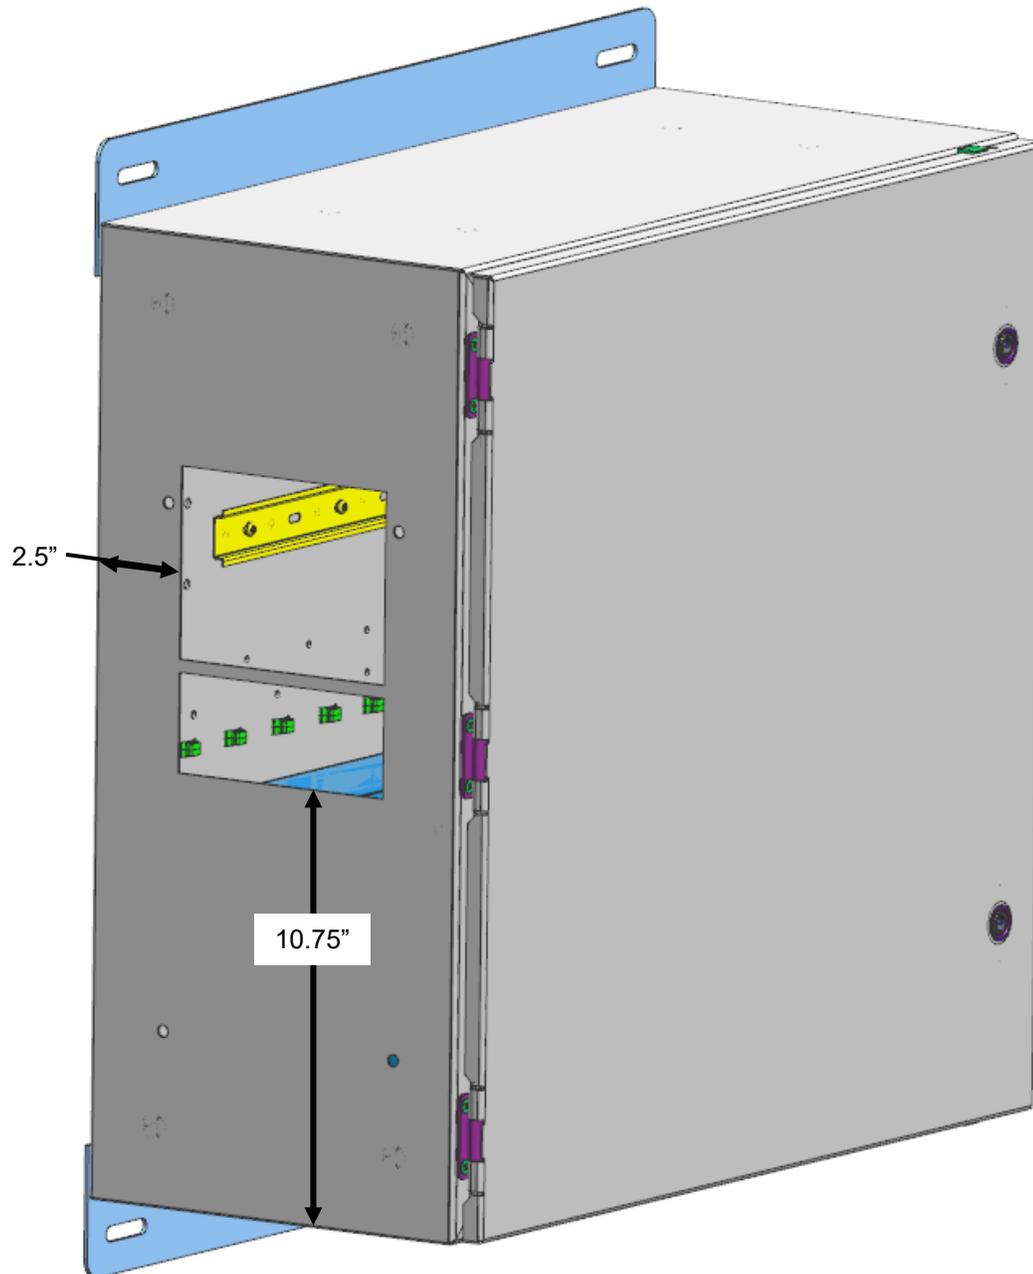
Shows the location of the cutout for the T15 AC unit on the Z22 enclosure. The cutout starts approximately 10.75 inches from the bottom of the enclosure and 2.5 inches from the rear of the enclosure.
